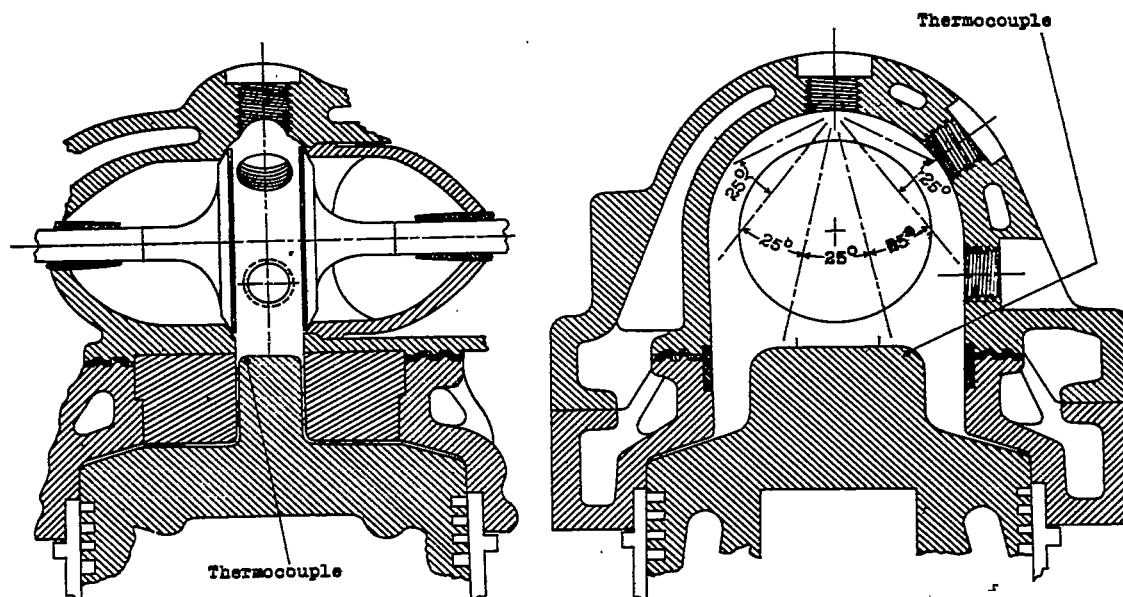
Arrangement of cylinder head and displacer piston of compression-ignition engine with location of thermocouple.
